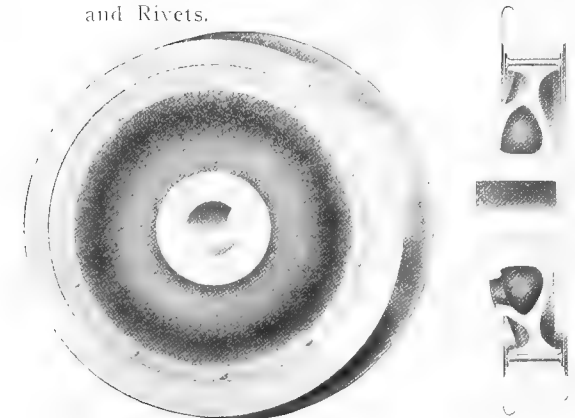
Cast Iron Plate Center with Tire Held by Shrinkage, Mansell Retaining Rings and Rivets.
